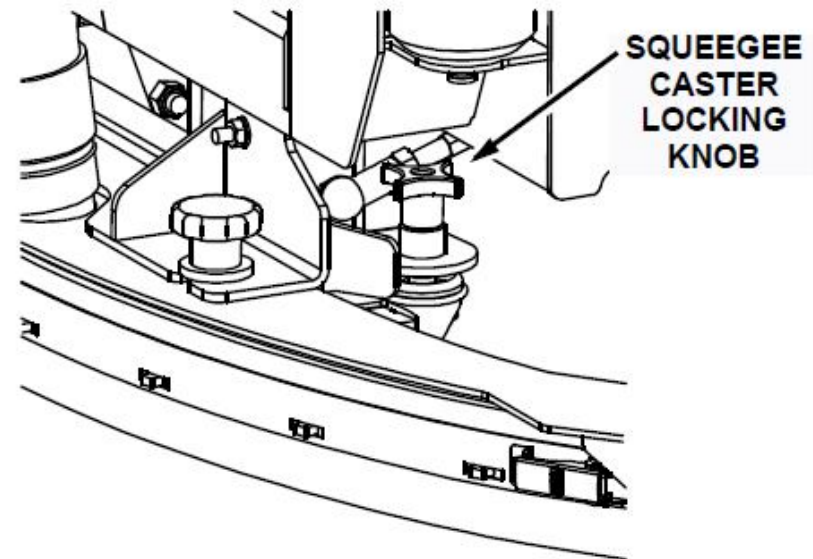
Adjusting the Rear Squeegee Blade Flair
